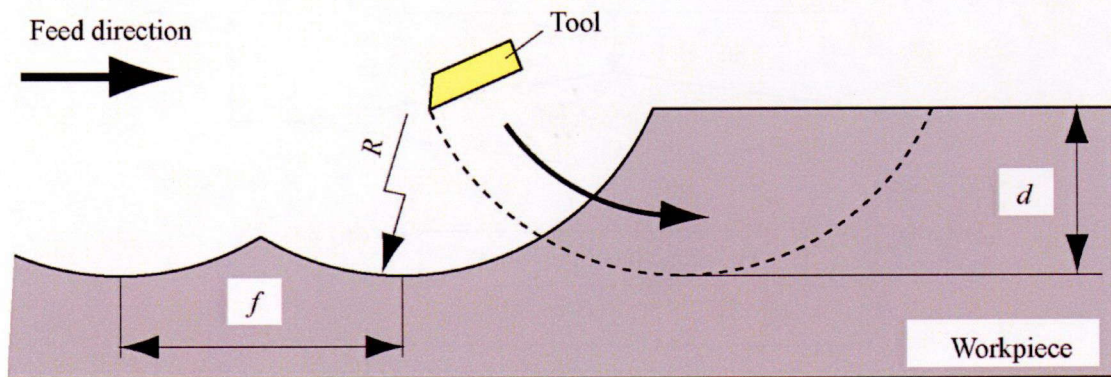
Calculation of the contact distance between the flank face and workpiece
